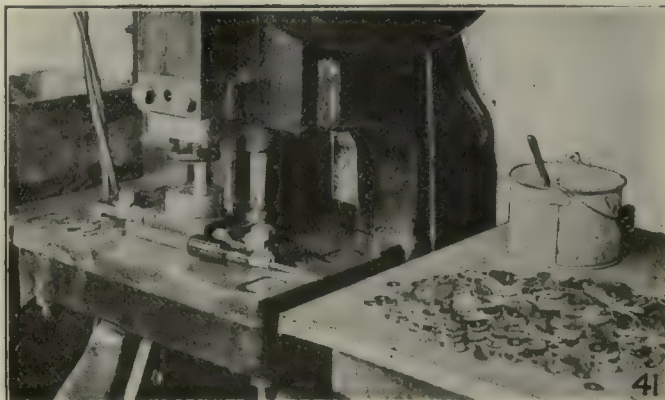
GEAR-PIERCING TOOLS IN POSITION
